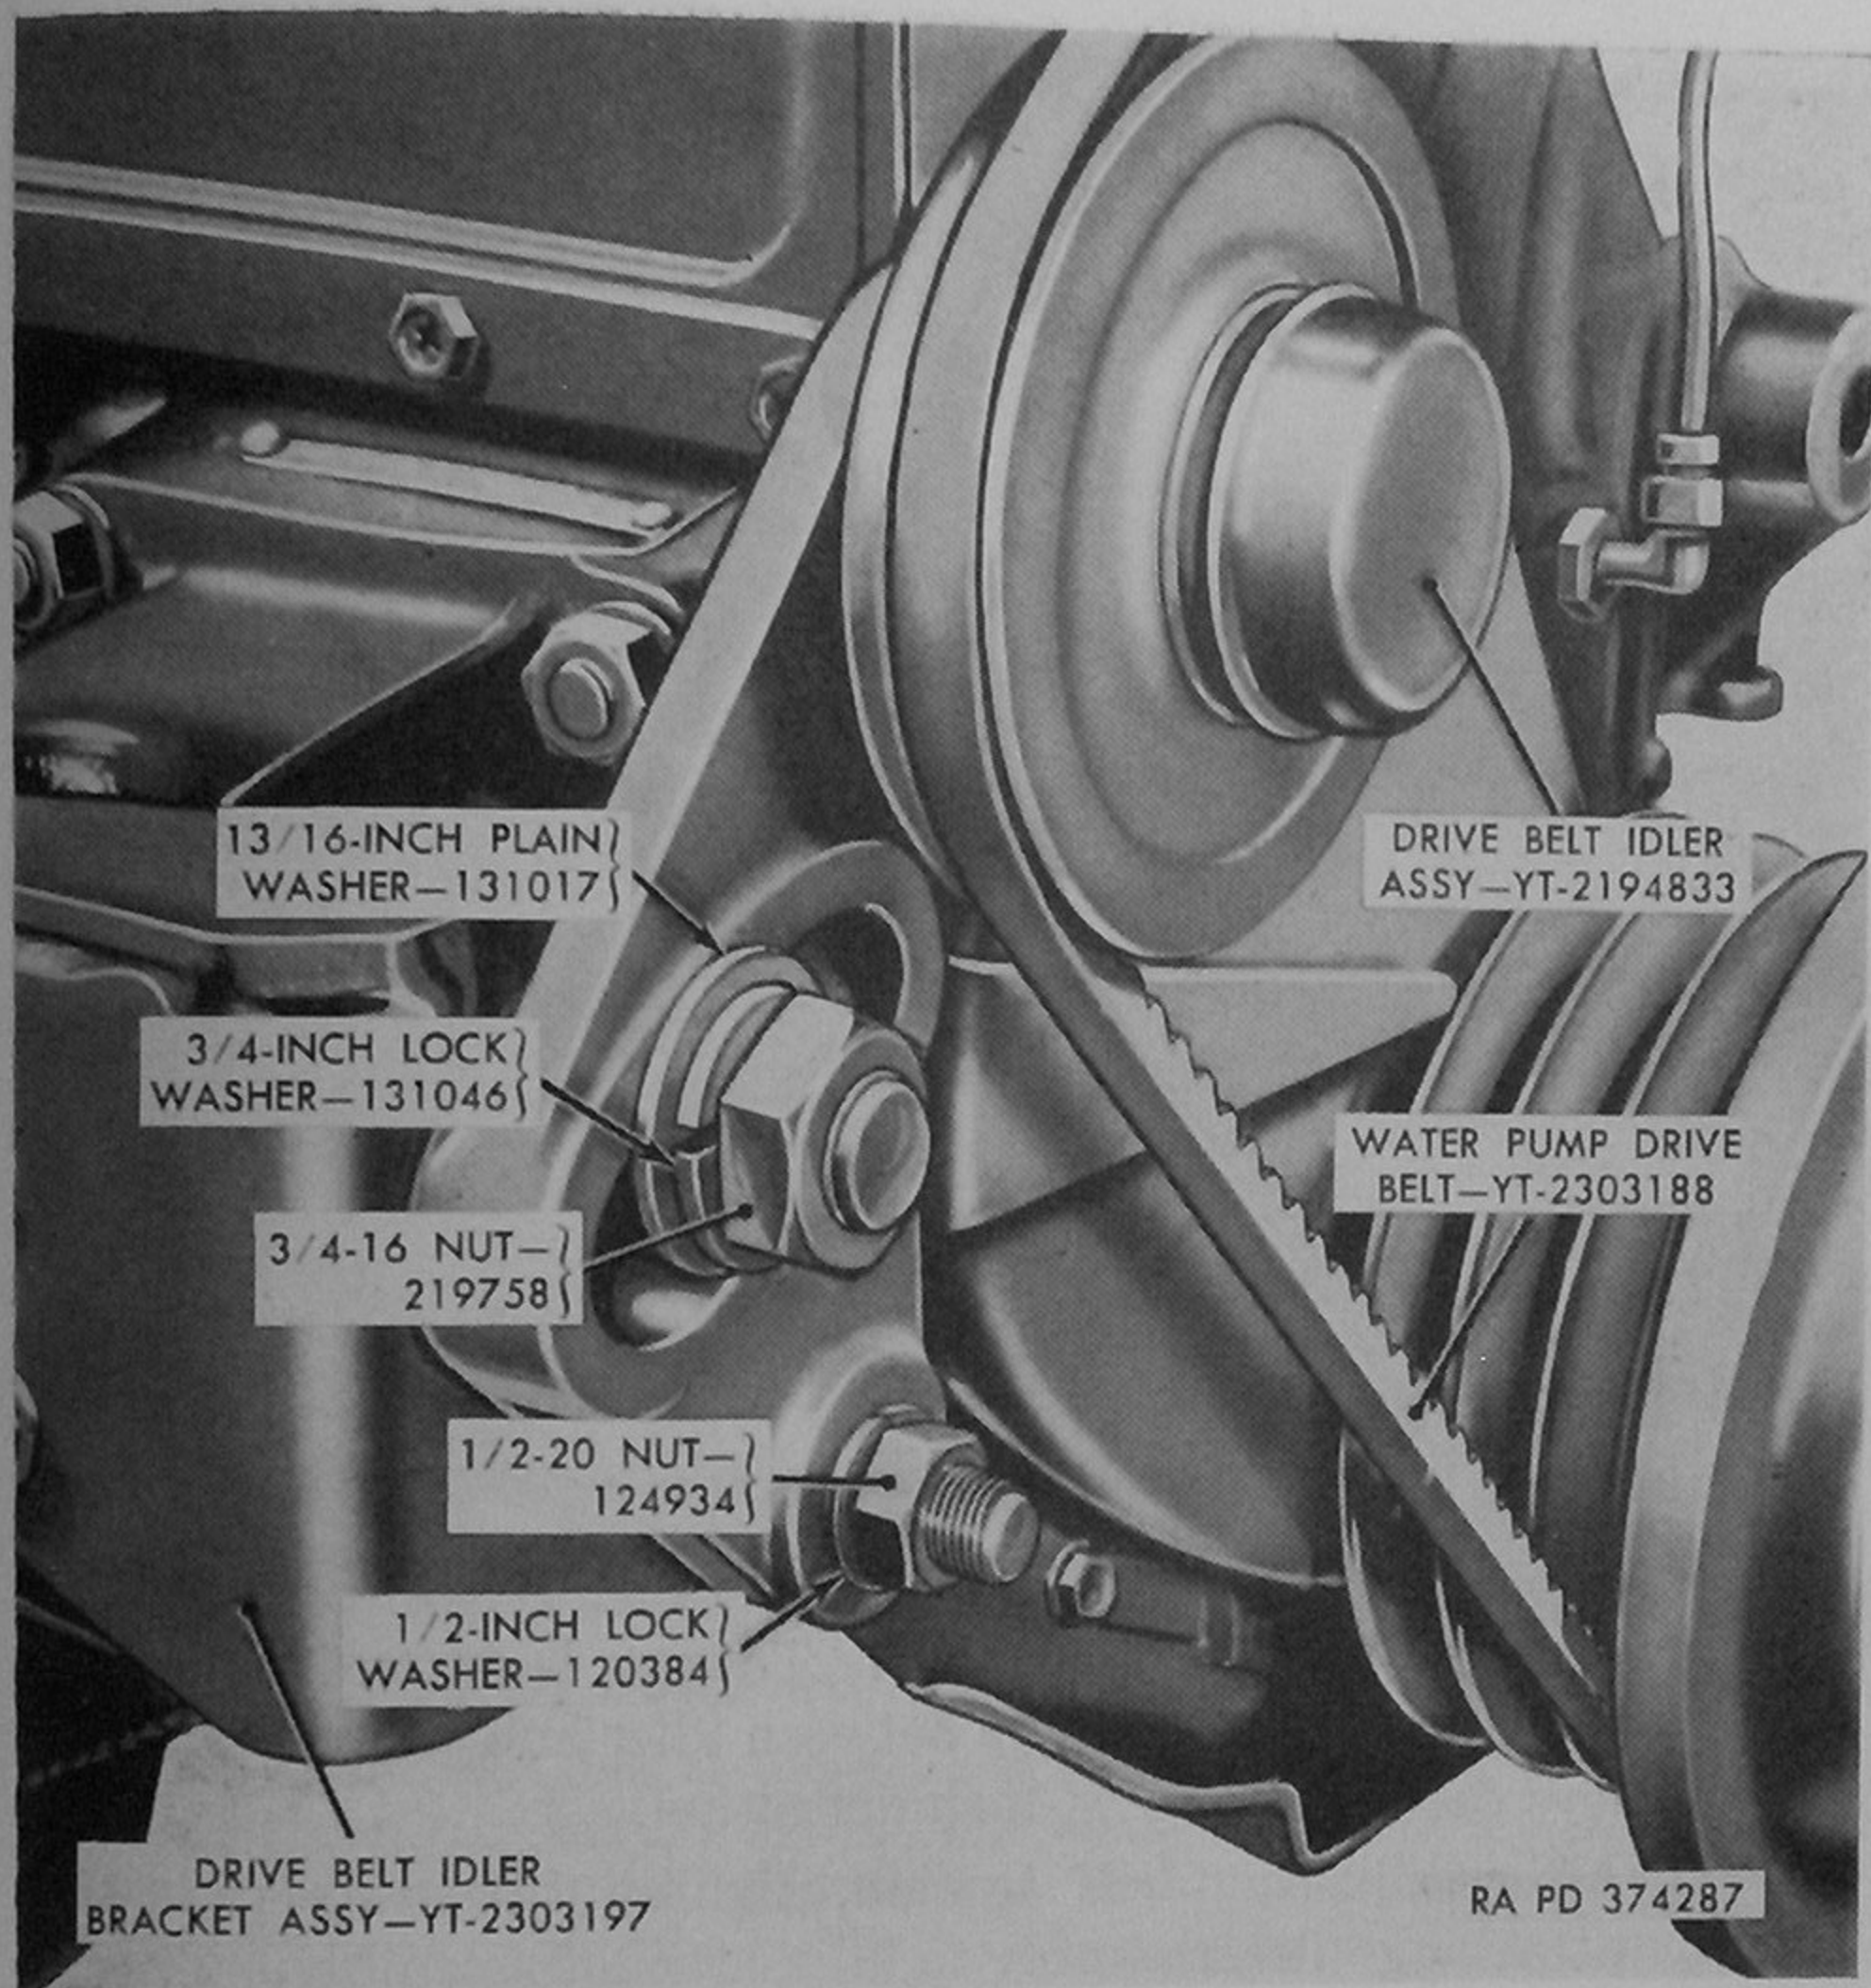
Drive belt idler pulley adjustment points—engine assembly 8329440.
